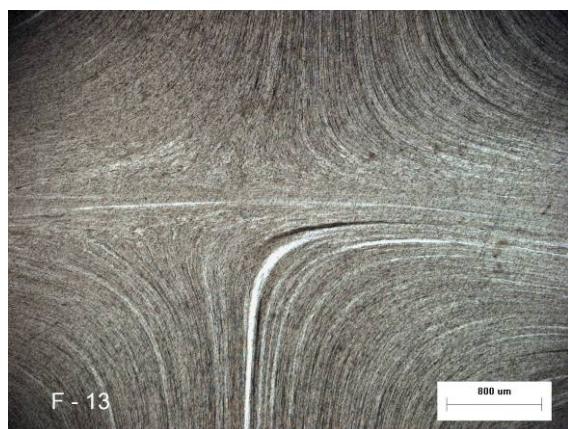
Flash Butt Weld Joint Produced with Increased Flashing Acceleration and Reduced Upset Current
